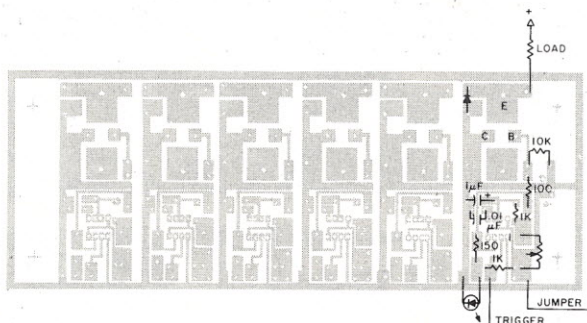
Component placement for a single channel of the Output Buffer/Driver circuit. Note that jumper wires connect adjacent channels to the 5 volt supply on the six-channel board.
